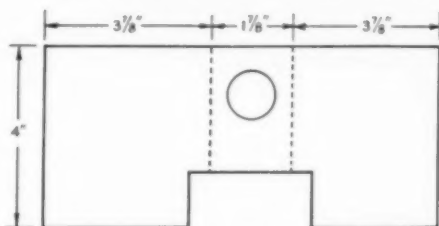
DIMENSIONS OF MOUNTING FOR THE 913
